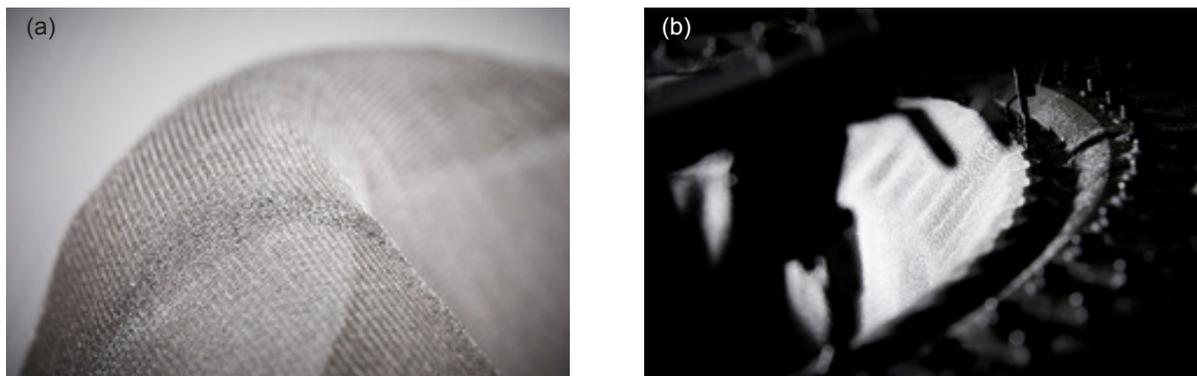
(a) The structure of a knitted gauze; (b) a gauze knitting machine
